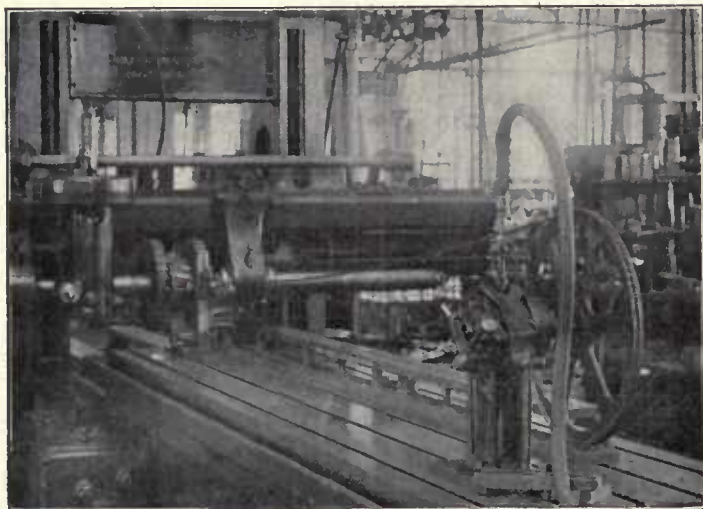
Sharpening Milling Cutters in Place on Arbor.
